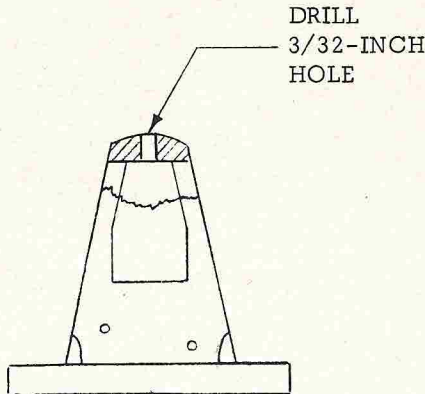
A — Modify C-9 and early C-91 pyramid reed seat by drilling hole as shown to improve carburetion. Late C-91 pyramid seat has hole as shown. CAUTION: Modification does not apply to other Homelite models.
